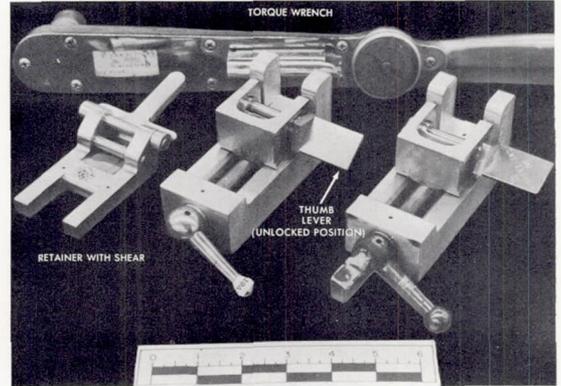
Weld joint fitup tool showing the thumb lever and the ball handle modified for torque applications.
